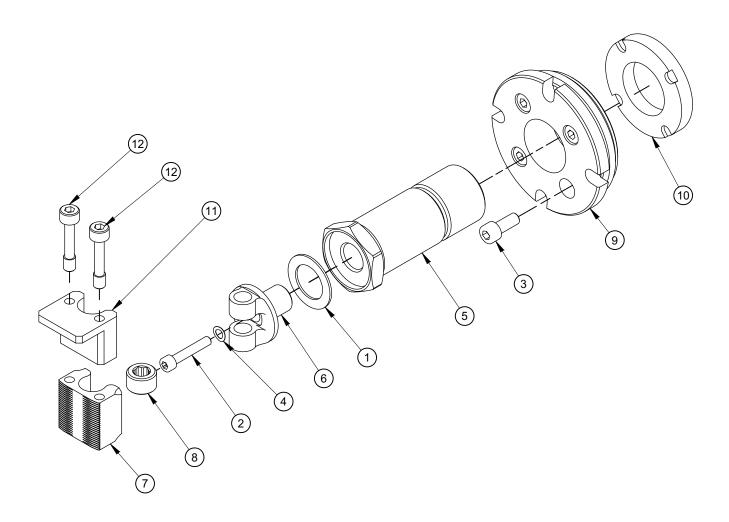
AIR VALVE ASSEMBLY (P/N 87916)
